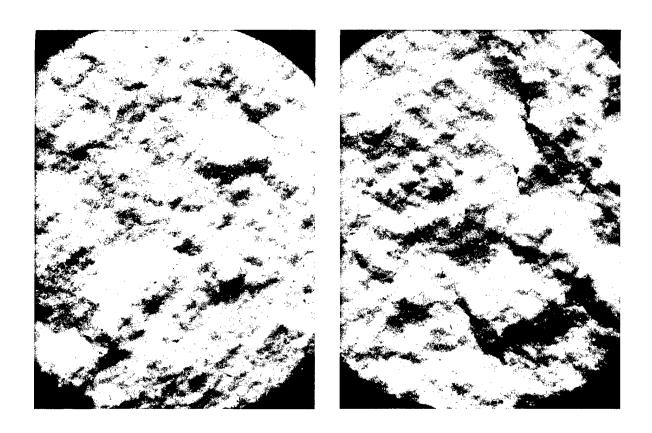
PHOTOMICROGRAPHS OF FRACTURE SURFACE OF EXTRUDED
